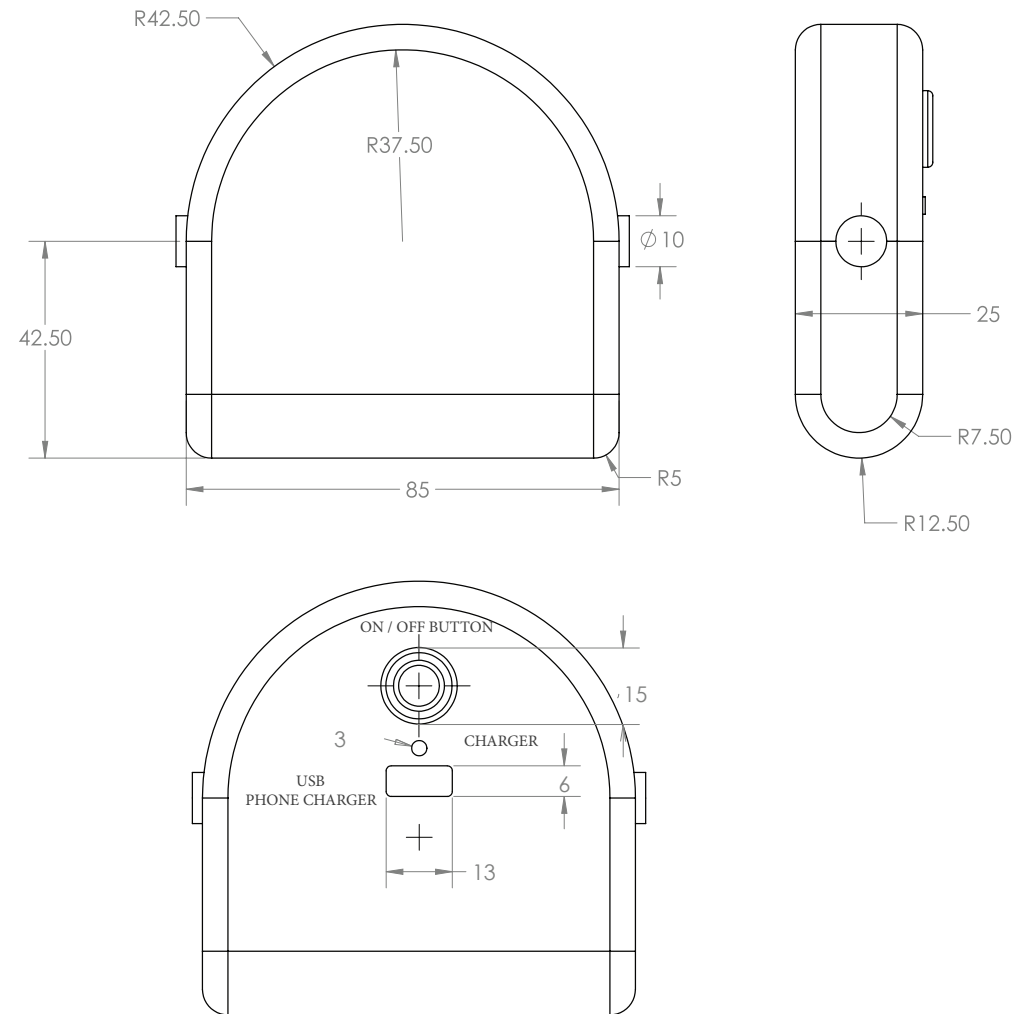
(A) OPTION - 1 MECHANICAL DRAWING
